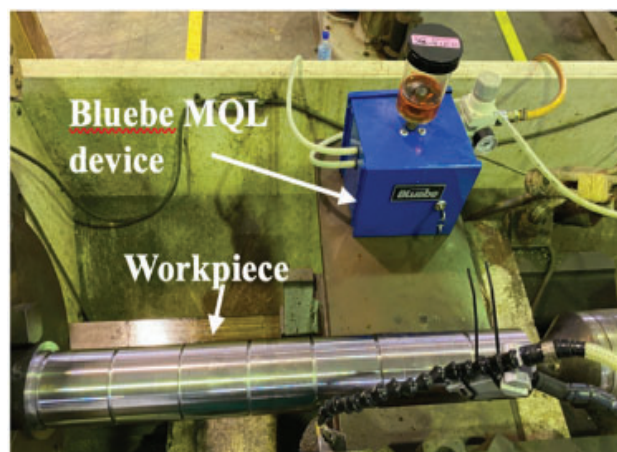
The segmented T6061 Aluminium alloy clamped in the lathe machine (HARRISON M390) with the MQL setup
